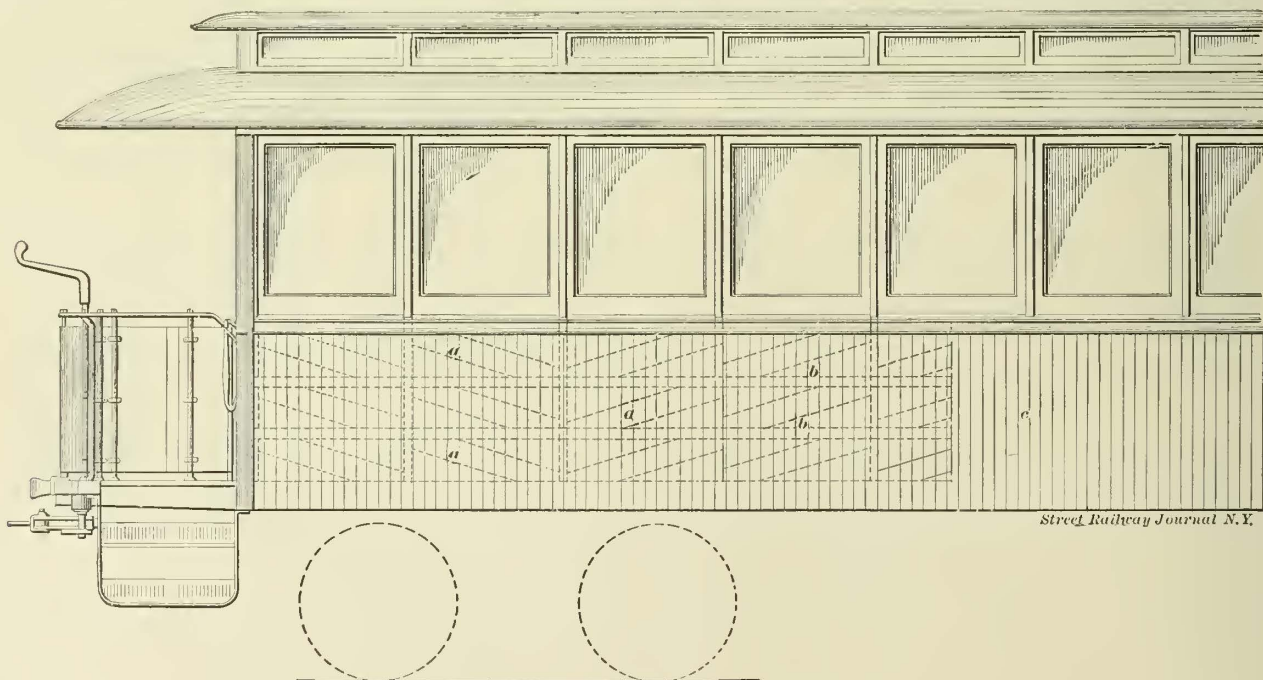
FRAMING WITHOUT TRUSS ROD.
